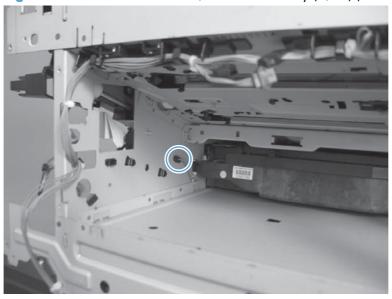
Remove the laser/scanner assembly (C/Bk) (1 of 5)
